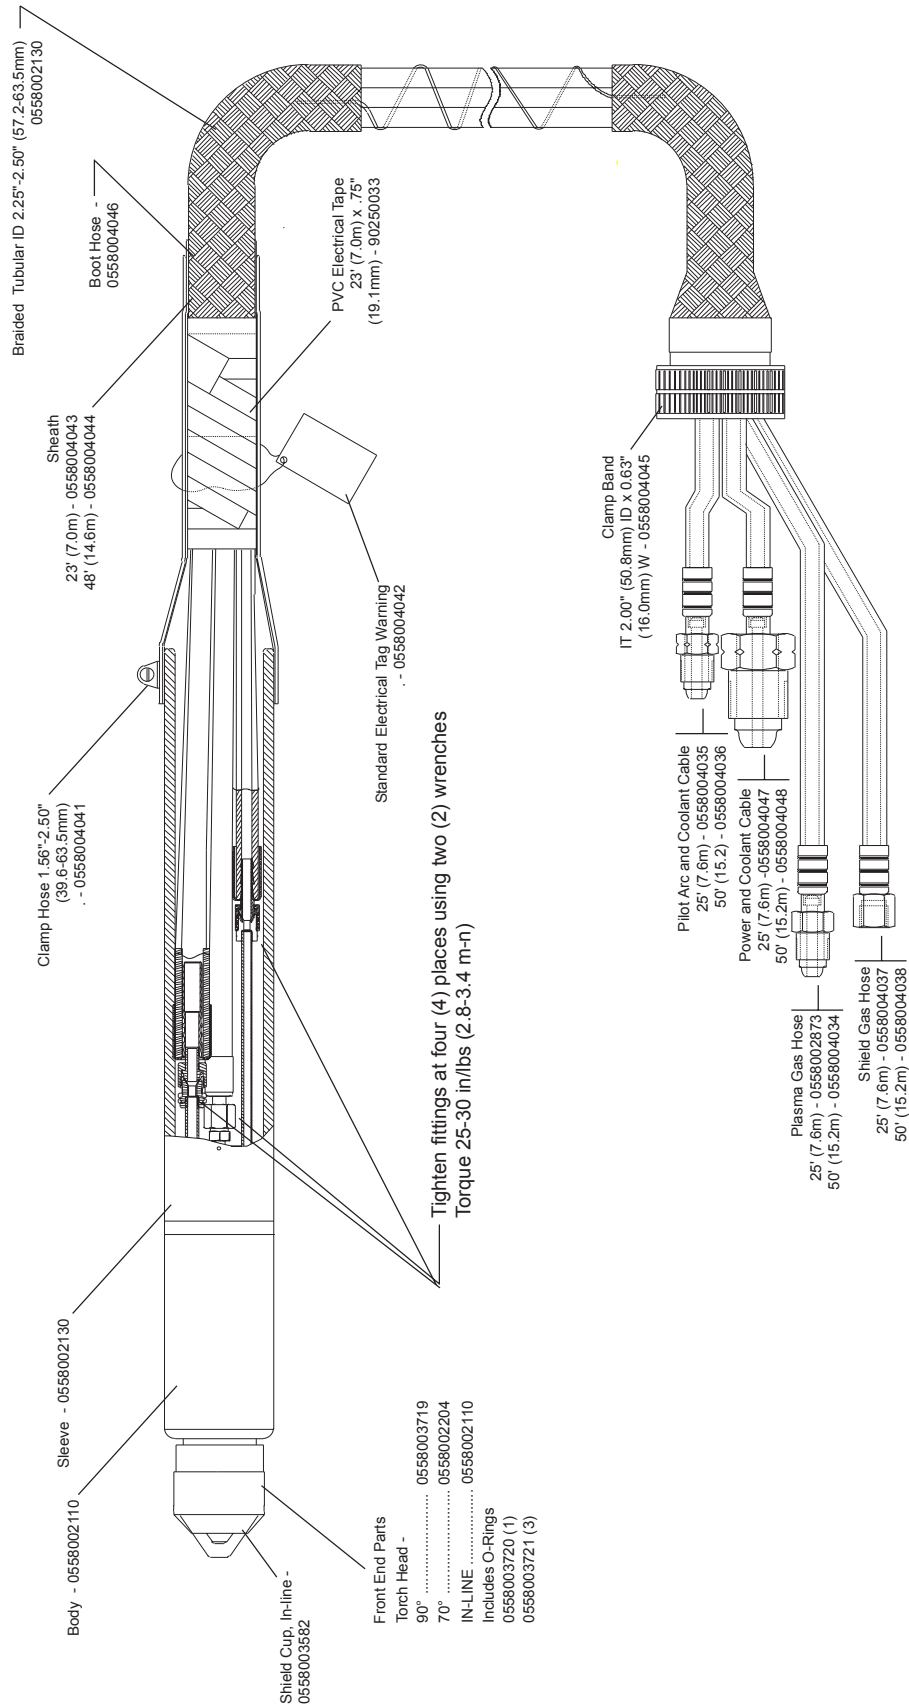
Replacement Parts - PT-26 In-Line AY Torch Assembly
